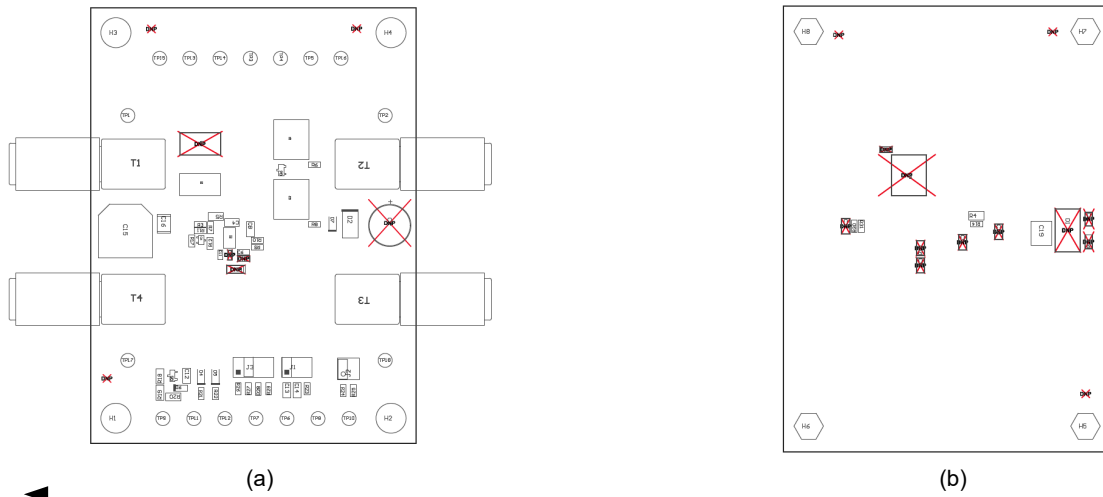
TPS48110Q1EVM Board (a) Top Assembly (b) Bottom Assembly
